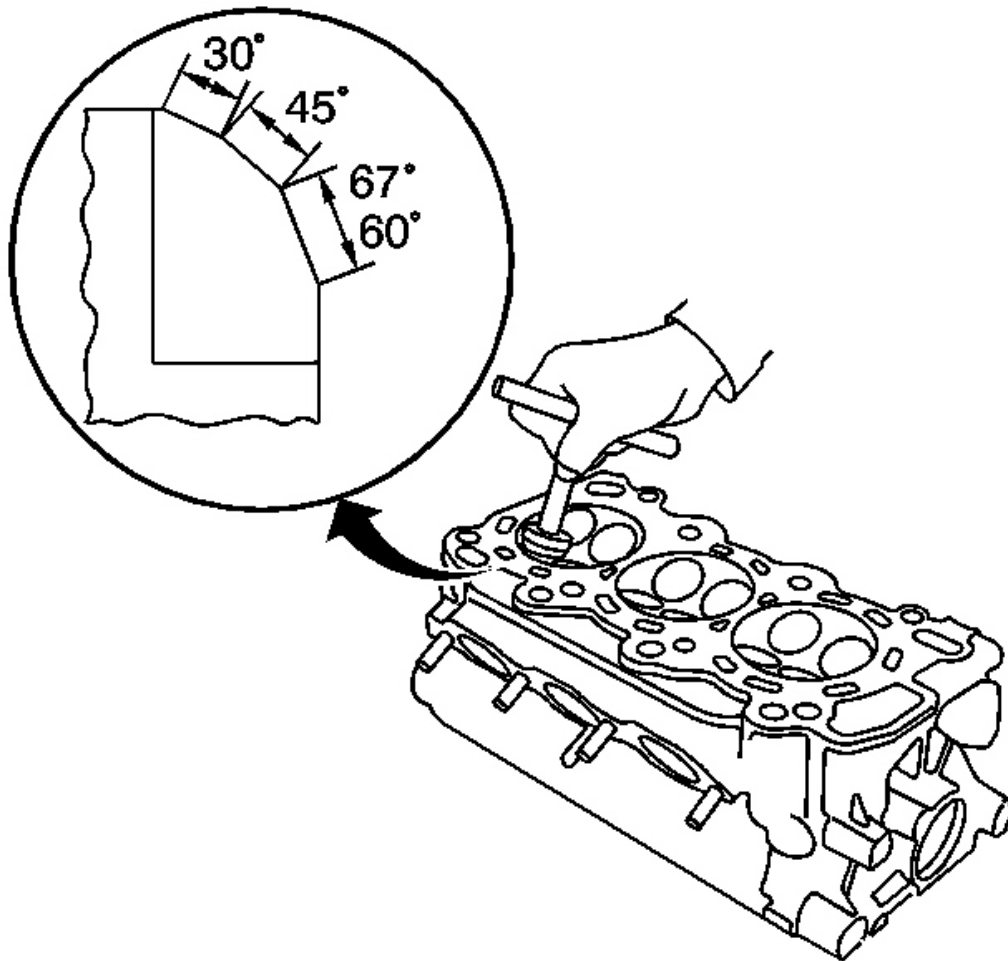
View Of Valve Seats Using A Seat Cutting Tool
